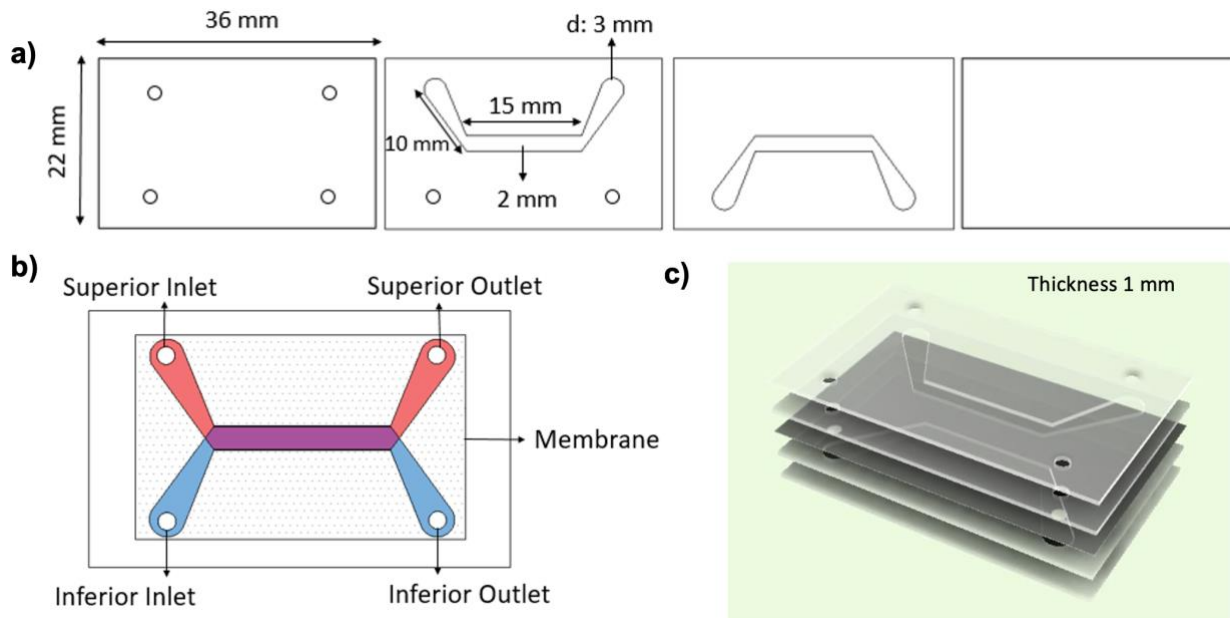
Design, dimensions and 3D view of the loaC #2 a) Pieces of the chip with its dimensions b) Top view with key components of the chip and c) Assembly of the chip under a 3D view.
